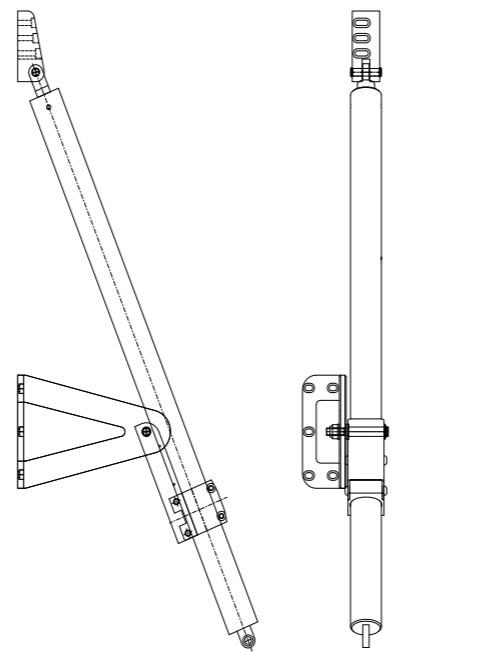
Type S spindle actuator with upper and lower console mounted with shifted pivot point
